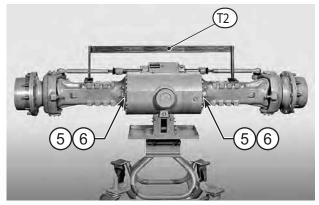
Using tool T2 (See drawing T2 p. 26) check that the arms are level, then finally lock them with screws (5) and washers (6) using the criss-cross method.
